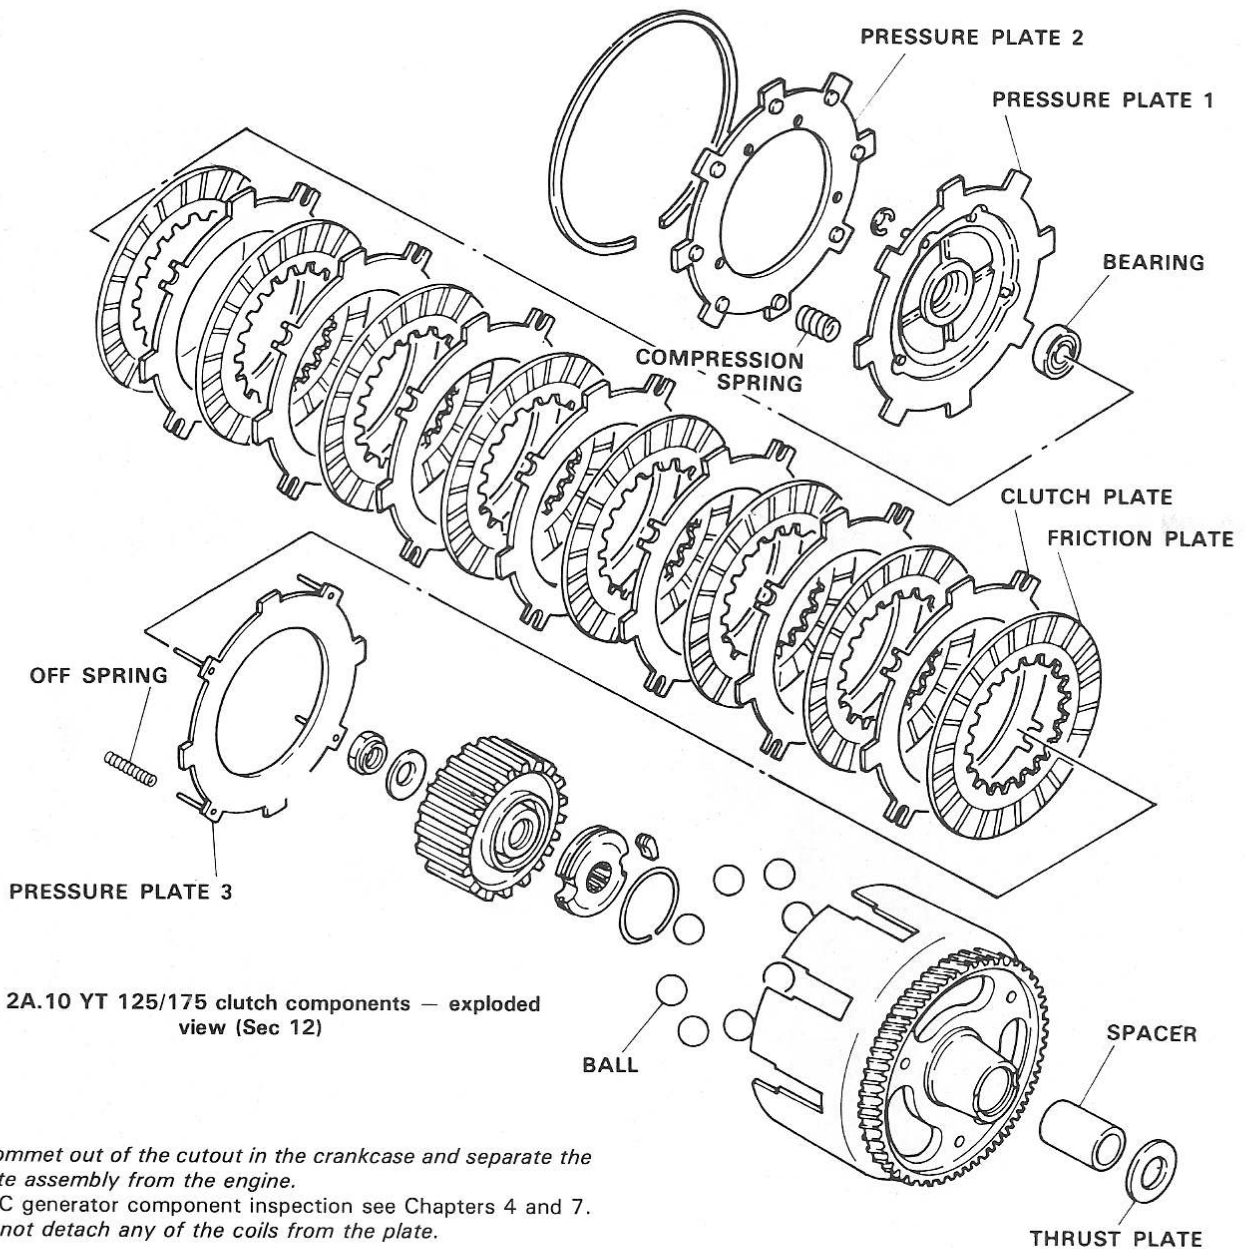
A.10 YT 125/175 clutch components — exploded view (Sec 12)
